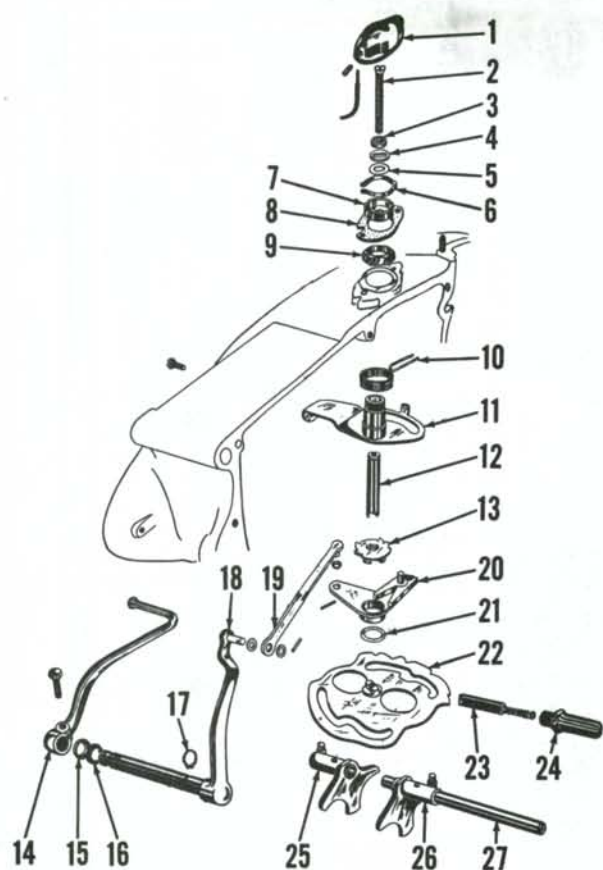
View of gear shift mechanism used on 250cc models. Other models are similar.
